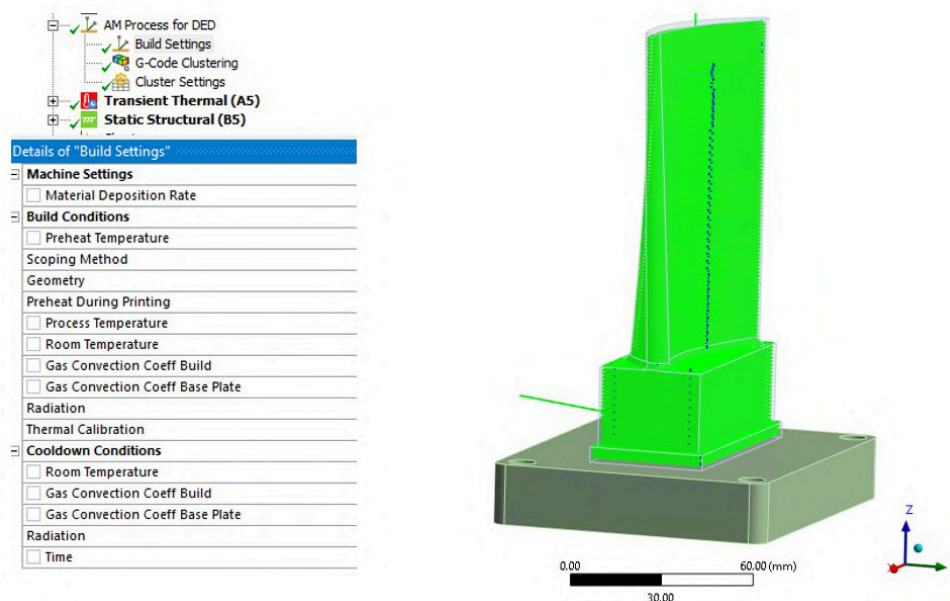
G-code weld path displayed on the turbine blade and process parameters used in Ansys 2023 R2
